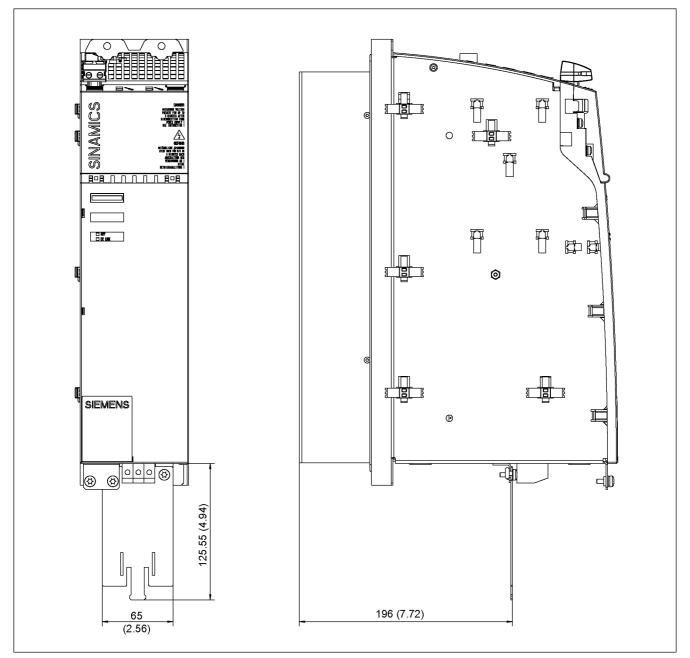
Dimension drawing of shielded terminal plate on a 100 mm module with external air cooling
